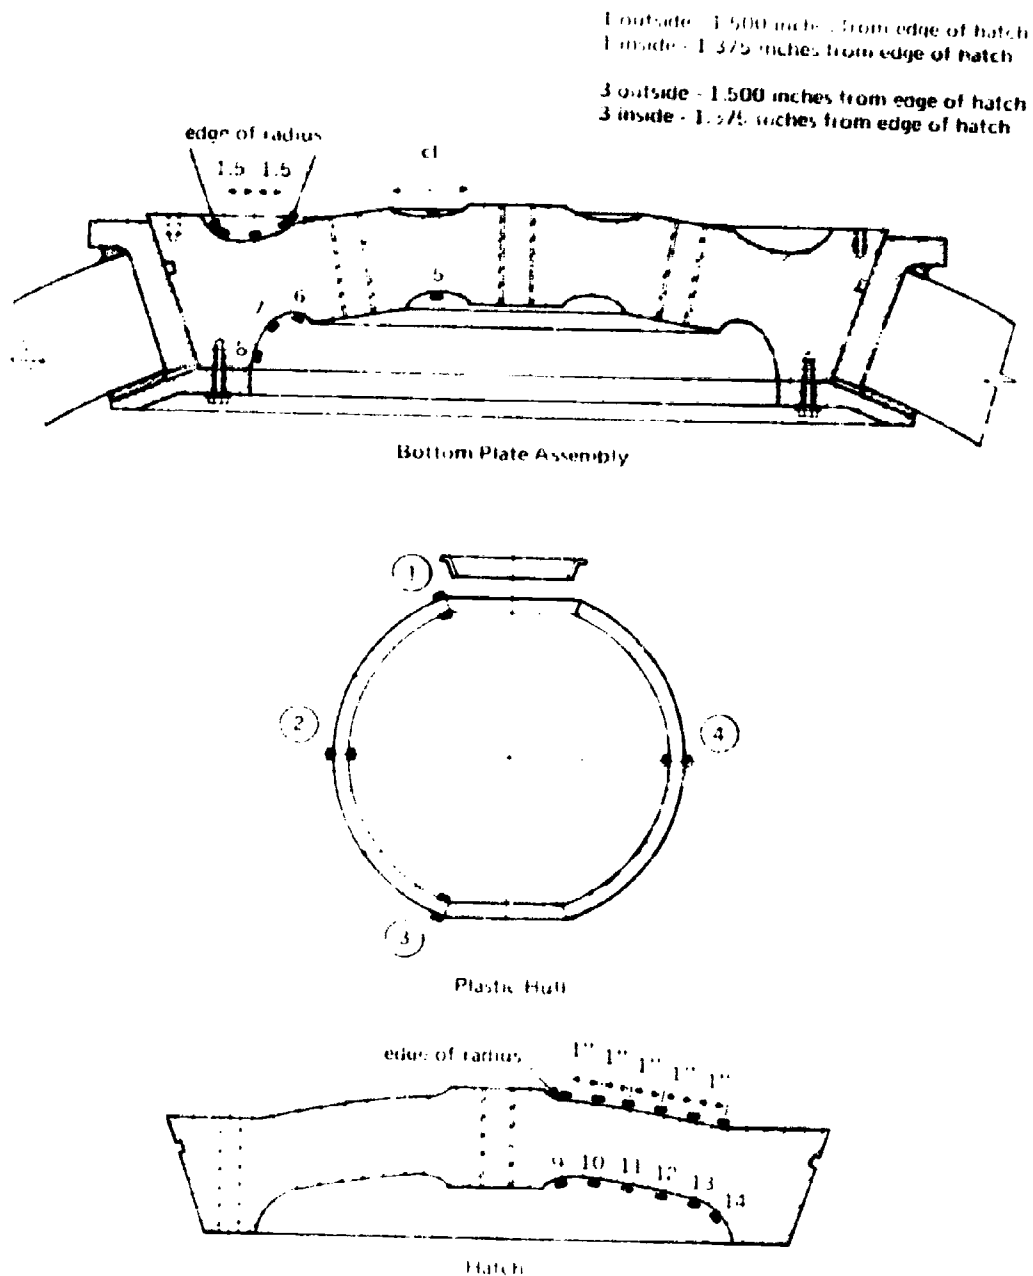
Location of strain gages on the 66 inch OD x 58 inch ID full scale Model 2000 Nemo Hull assembly.
